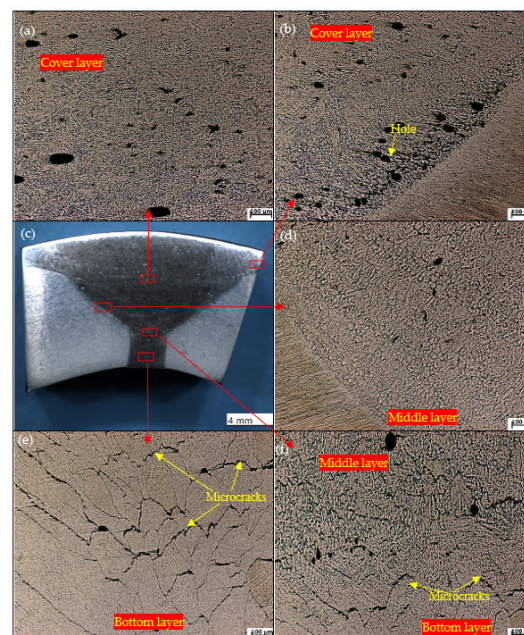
Face bending specimen metallography of the ER5356 welded joint, (a) the interface between the cover and middle layers, (b) the FZ of the cover layer, (c) the macromorphology of cross-section of the weld joint, (d) the FZ of the middle layer, (e) the weld center of the bottom layer, and (f) the interface between the middle and bottom layers.
